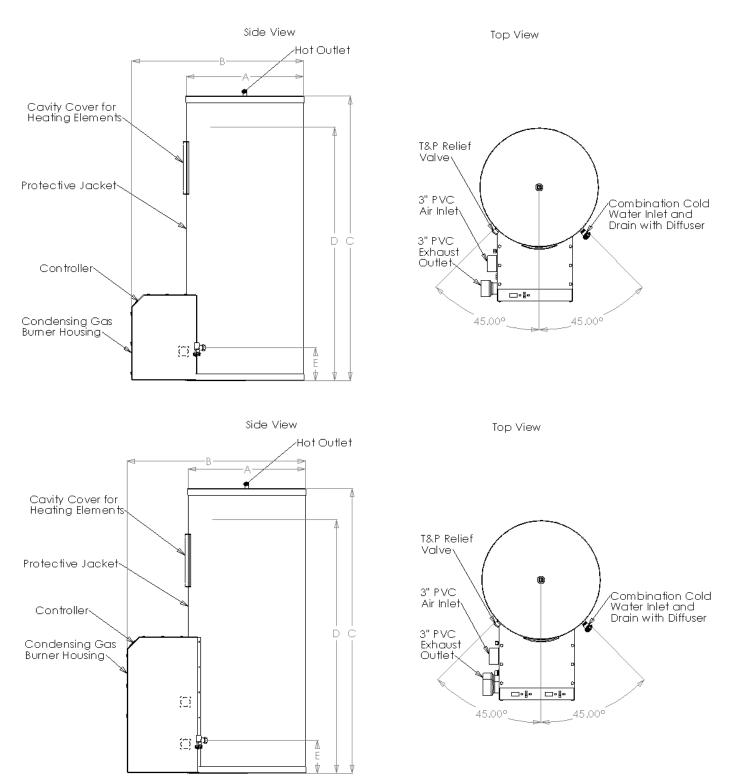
Tank Assembly (55k Btu Unit on top, 110k Unit on bottom)
